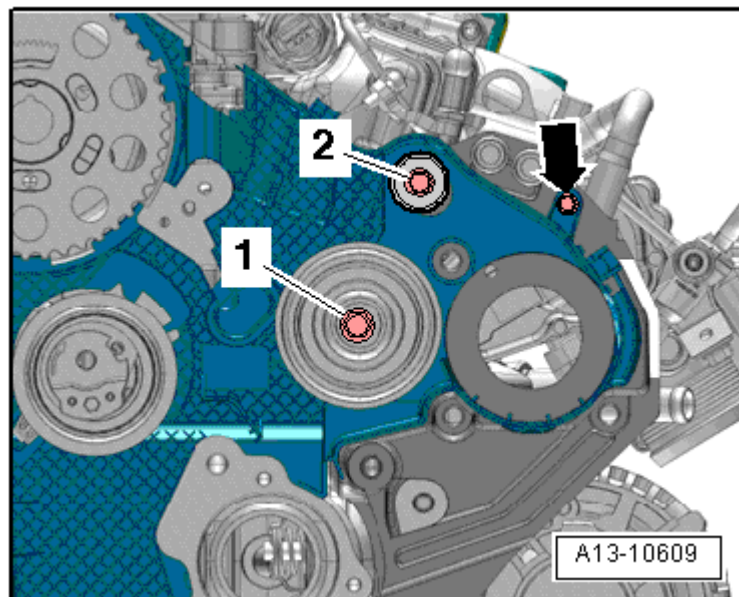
Identifying Idler Roller Bolts -1 And 2-
